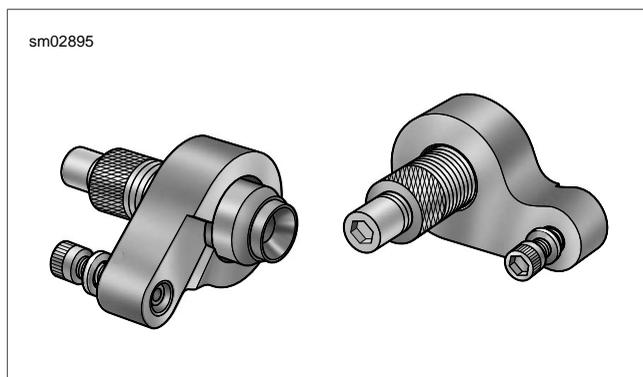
Vehicle Alignment Tool (HD-46247A)
